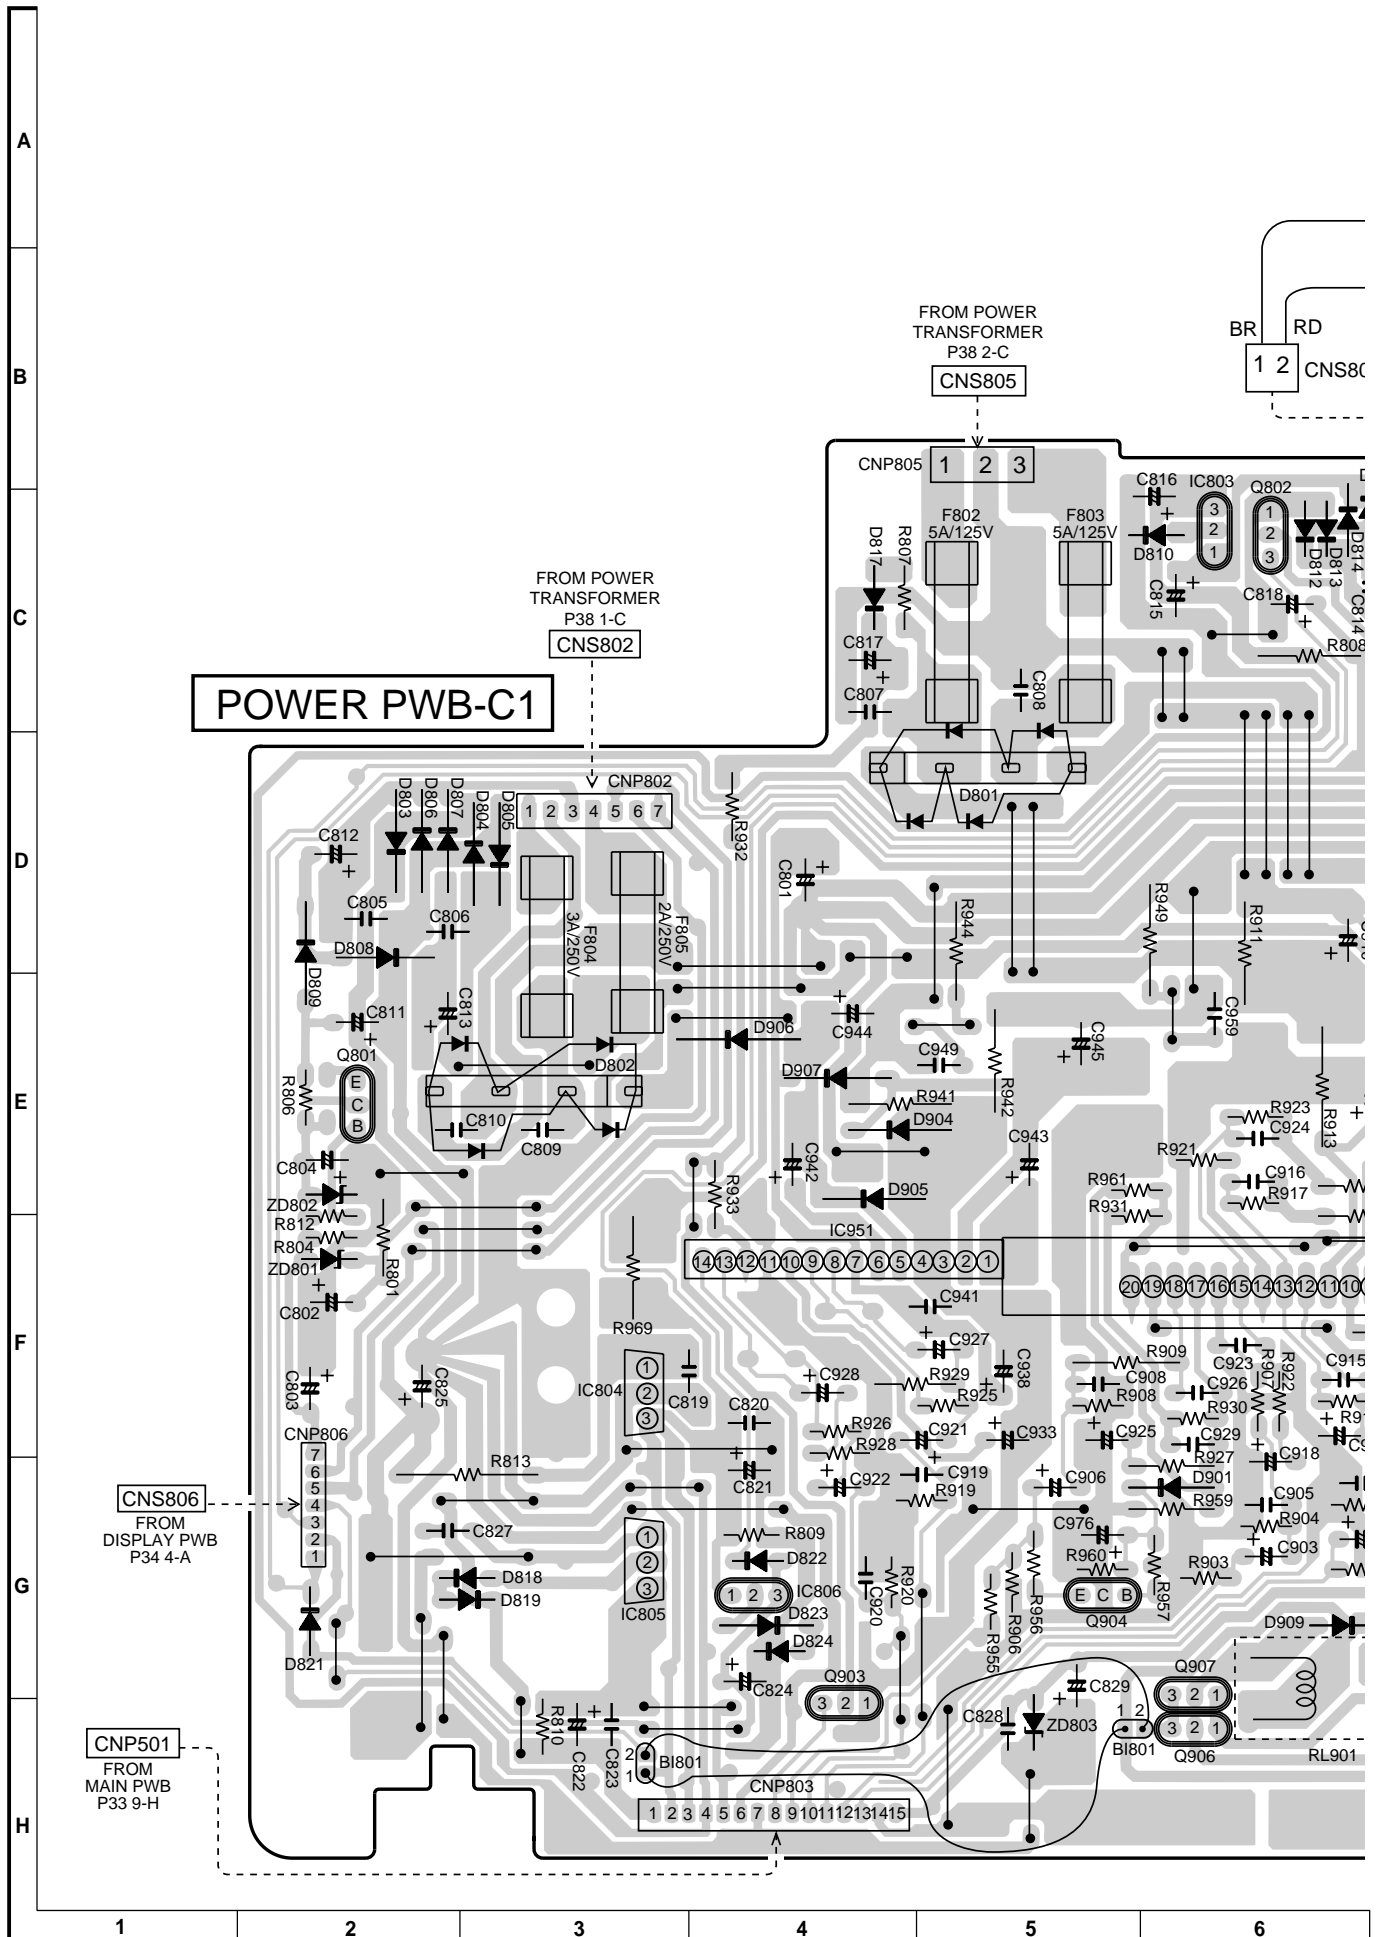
WIRING SIDE OF P.W.BOARD (5/8)
